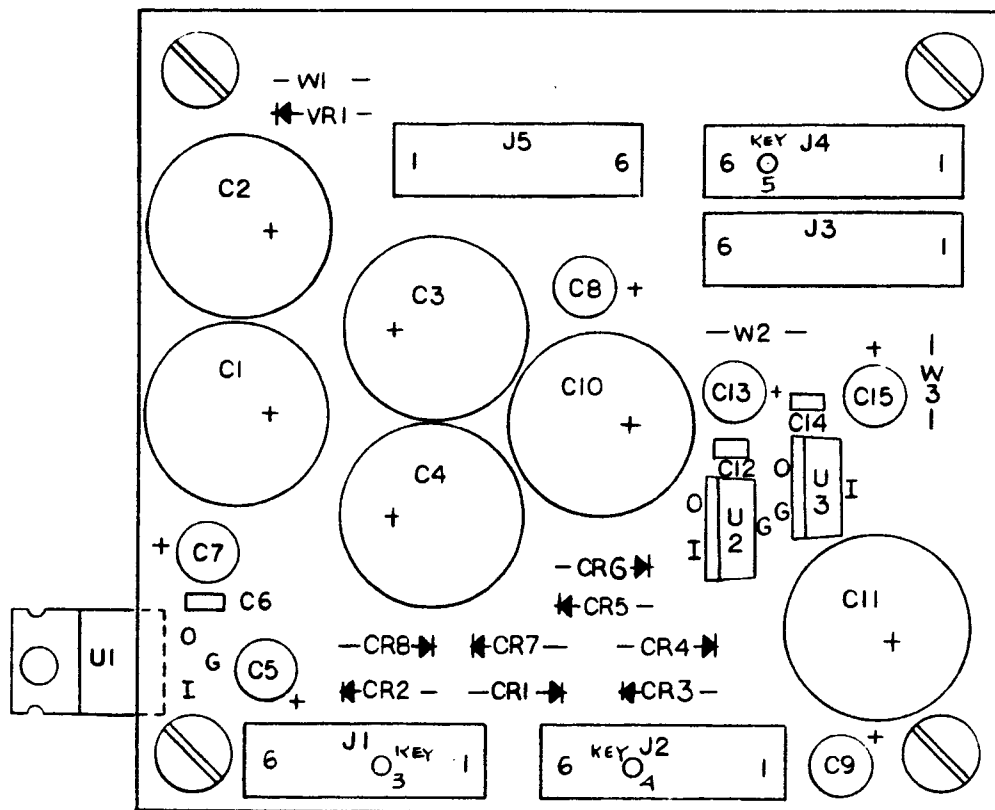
ASSEMBLY DRAWING - DC POWER SUPPLY
